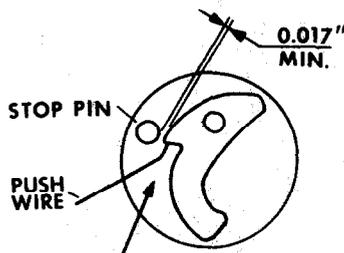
Checking Flyweight to Stop Pin Clearance, Recessed Impulse Coupling
